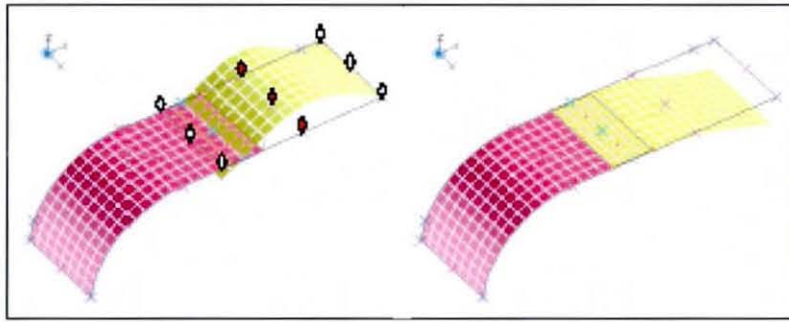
(a) Part 1 variation with a unit displacement to one welding point, (b) Effect of this variability on the assembly (Sellem and Riviere, 1999)
